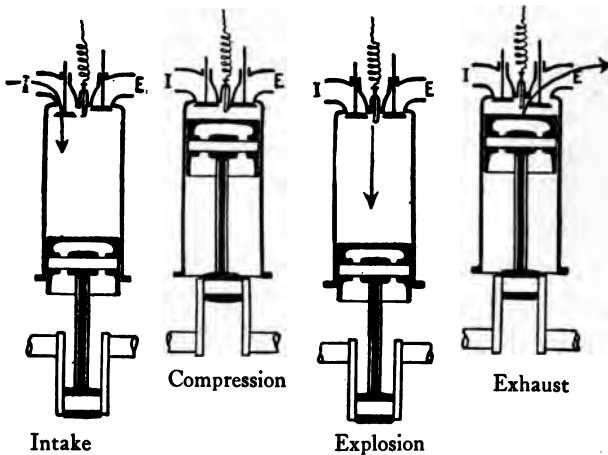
Four-stroke Cycle. *I*, Intake Valve. *E*, Exhaust Valve
